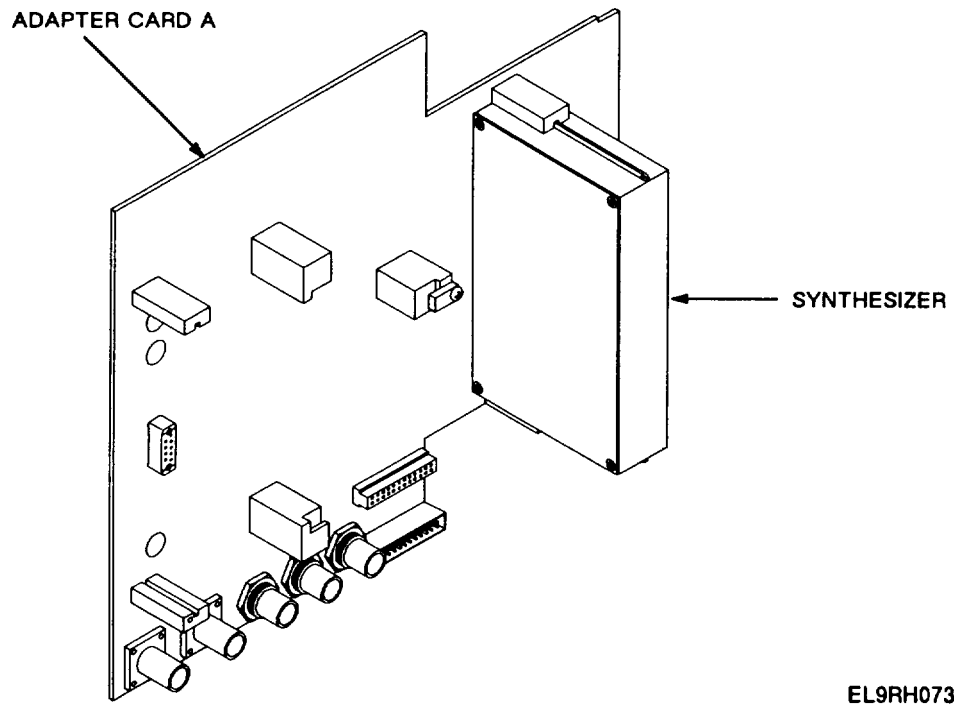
Installation of Synthesizer Assembly on Adapter Card A
